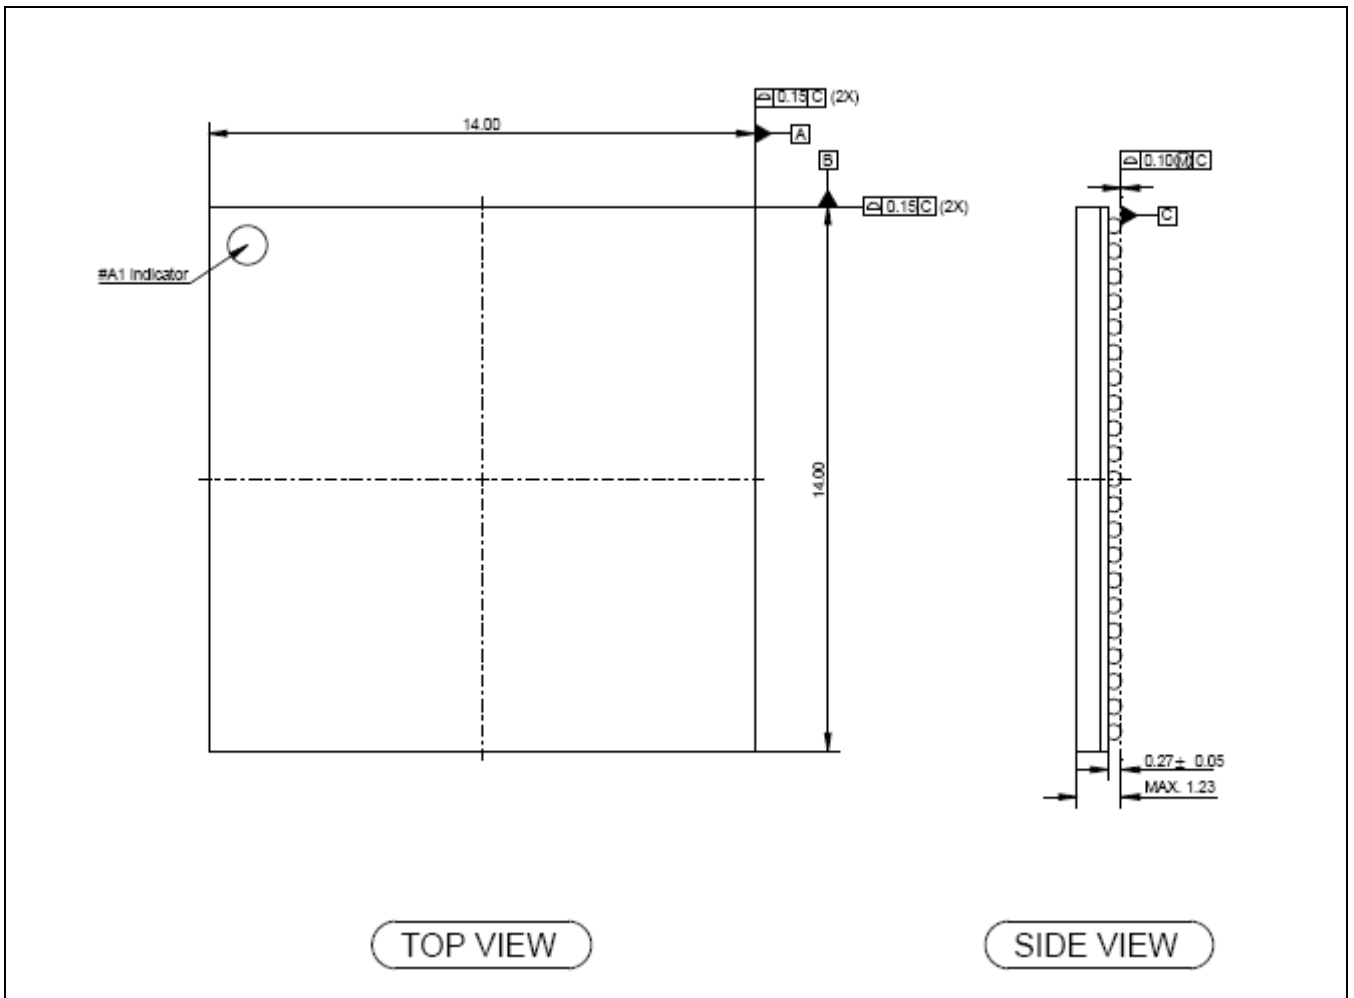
380-FBGA-1414 Package Dimension 1 (Top View)
